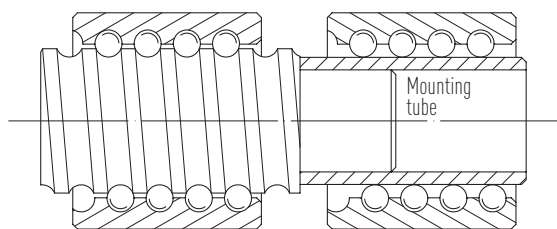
Removing the nut from the shaft using the mounting tube
